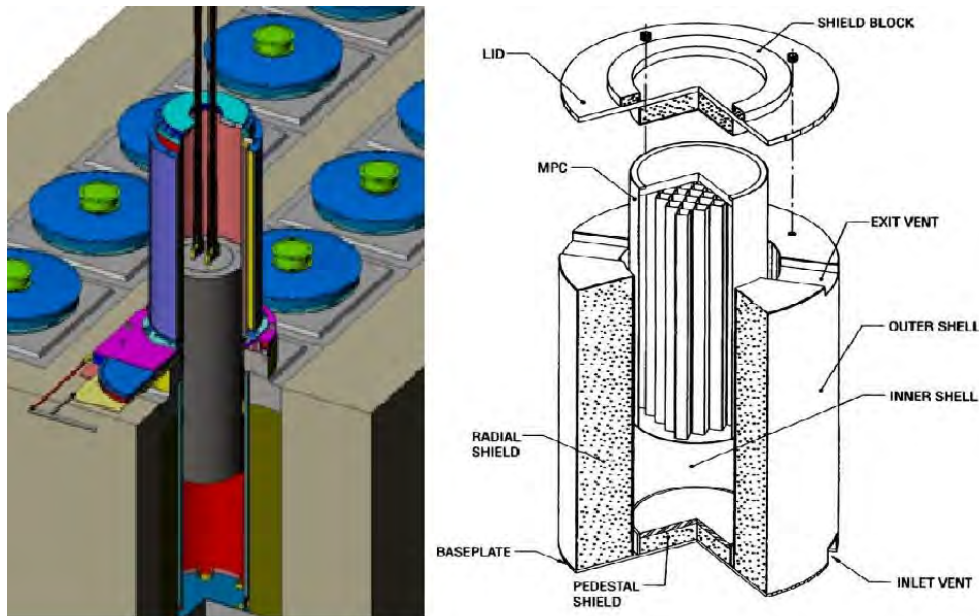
4 Cross-section of the storage modules of the Hi-Storm 100U storage facility
